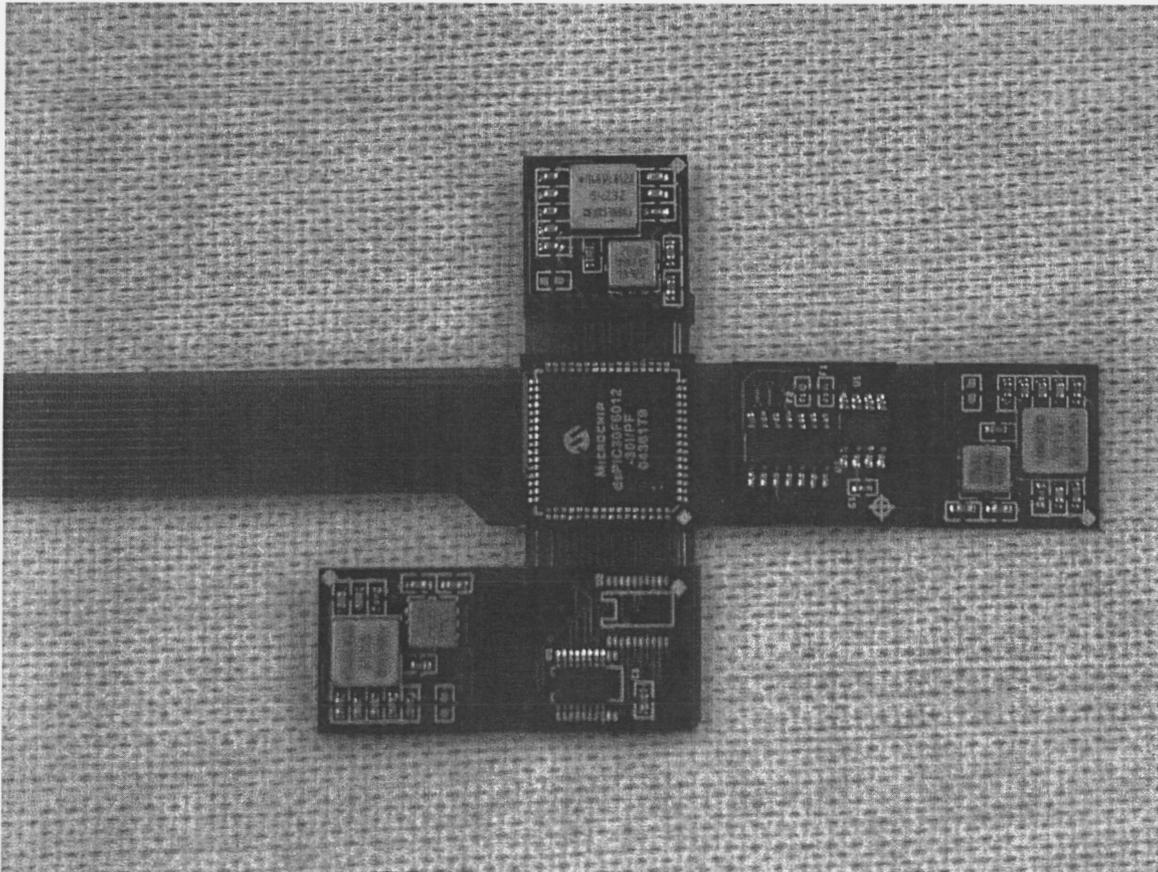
Example of Rigid-Flex Assembly prior to Folding. The final assembly will be folded to create a cube.
